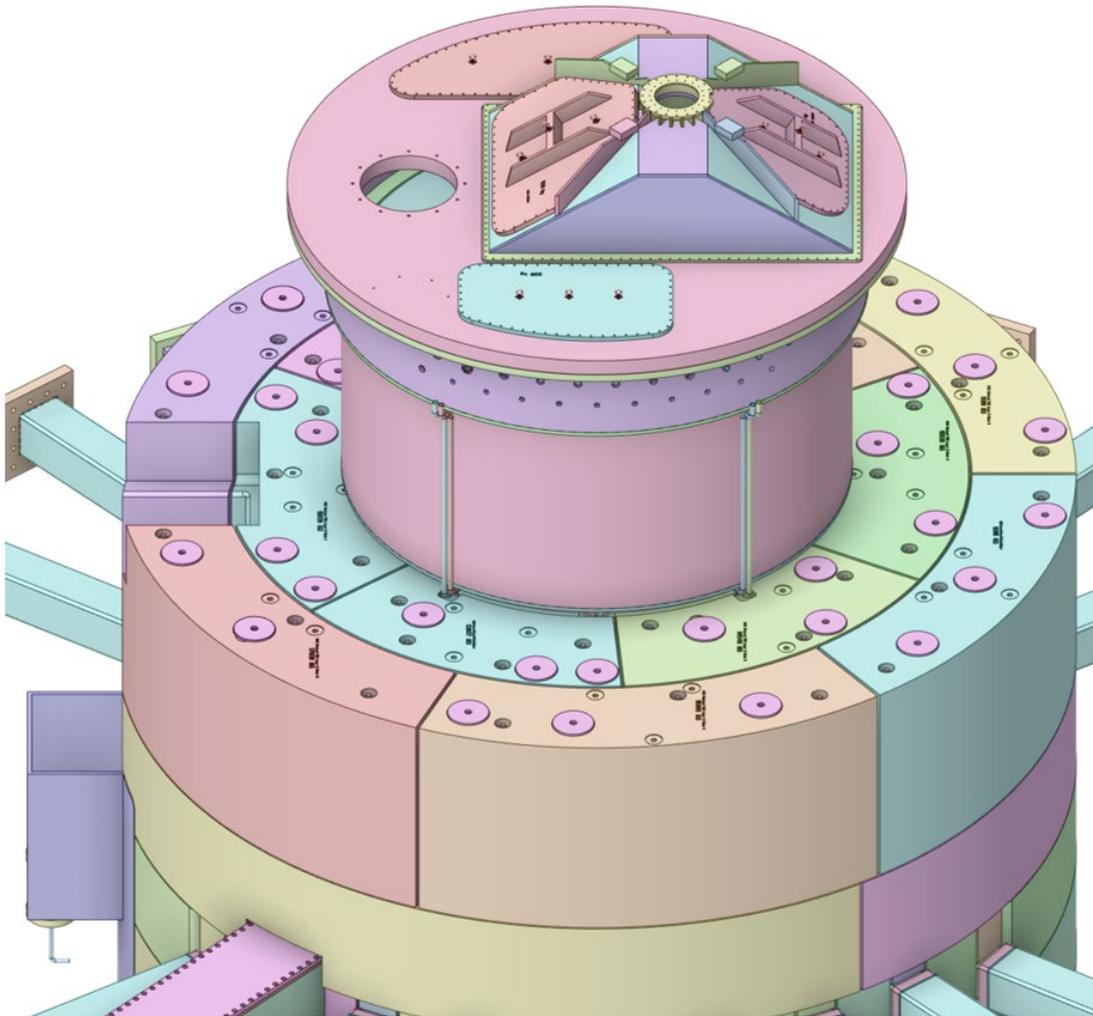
Bulk shielding installed up to layer 4 with CV installed
